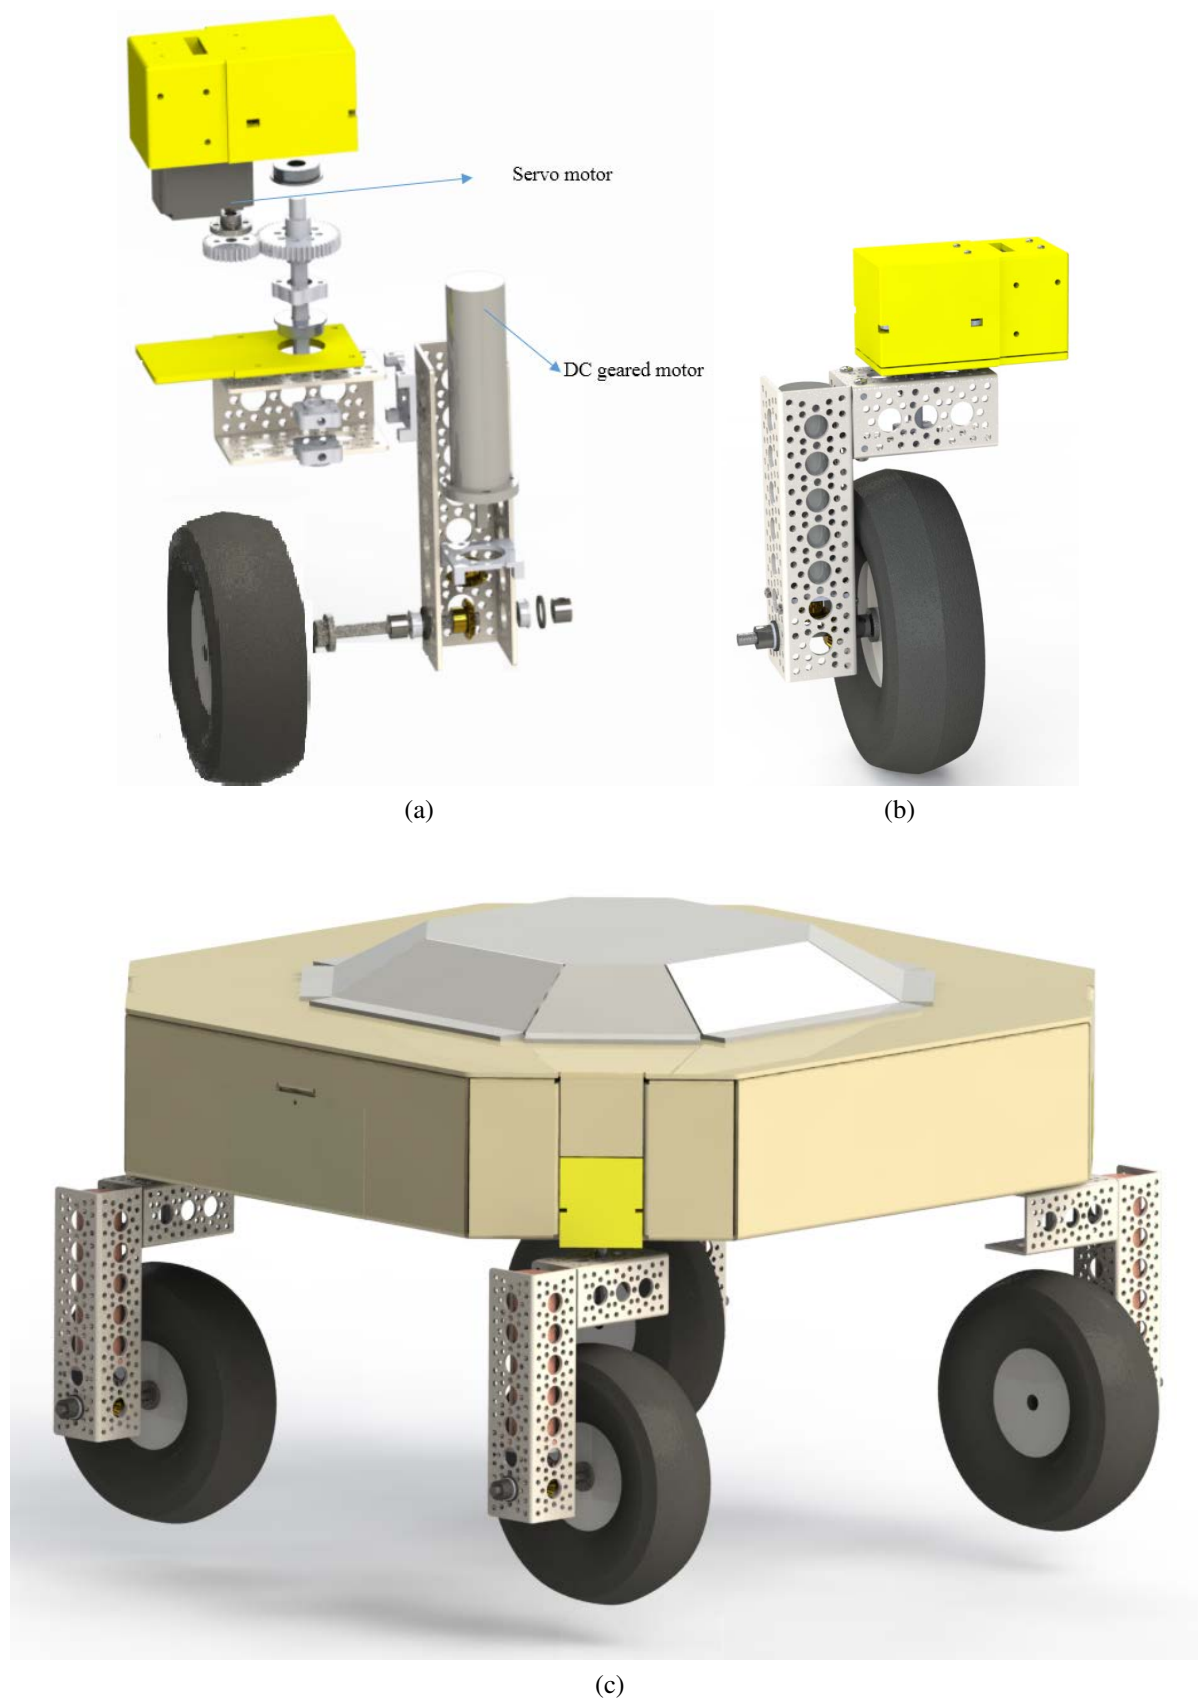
3D CAD model of MARIO; (a) exploded view of a wheel module, (b) assembled view of a wheel module, (c) Assembled MARIO.
